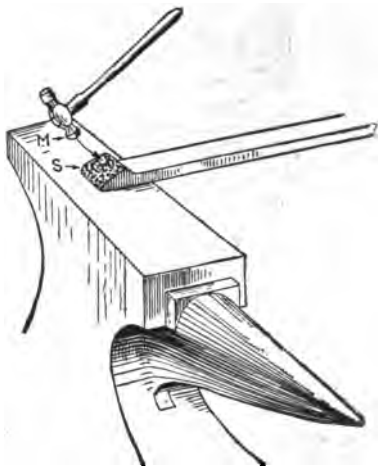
,652.—Making a scarf for a scarf weld. To do this, the upset end is thinned down, generally with the peen of the hammer, drawing it out thin at the point and crowding the metal together at the stock by drawing the hammer as shown at M. The faces to be welded should be rounded as shown at S, so that the pieces first come in contact at the center, in order to give the slag and impurities an opportunity to squeeze out as the weld is being closed.
